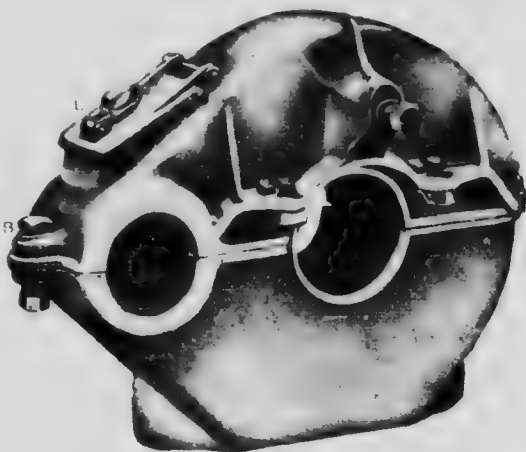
Gear Case of Dick, Kerr Tramcar Motor.
